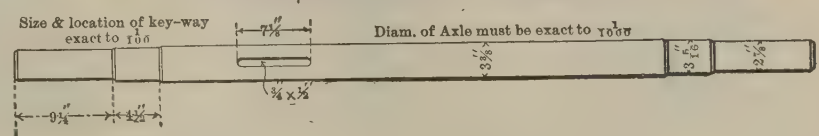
AXLE FOR T.-H. W. P. MOTOR.
